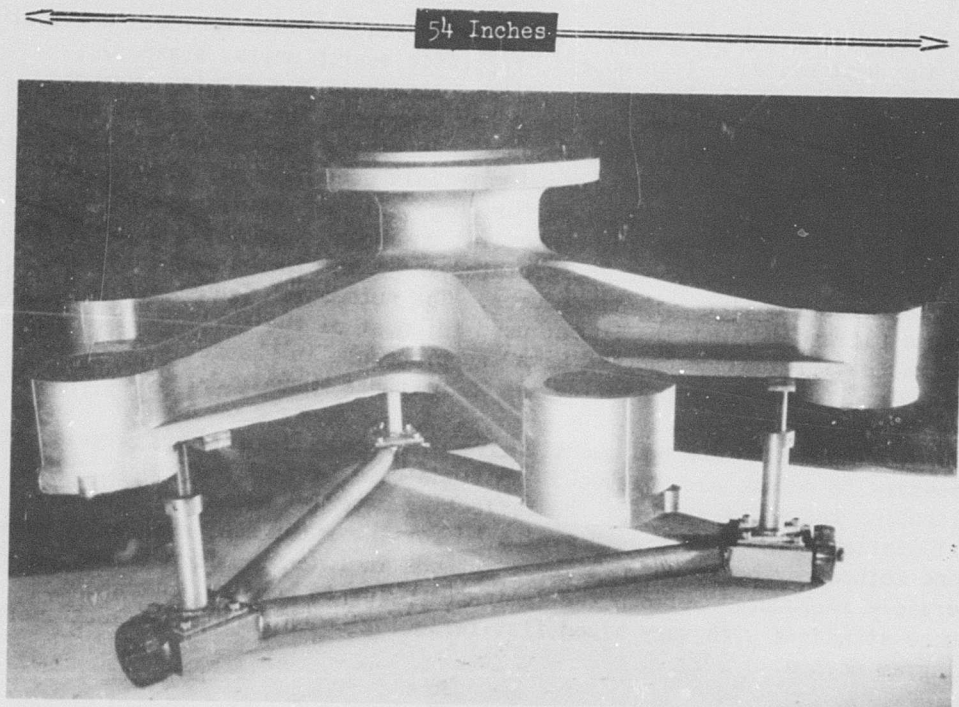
Ultrasonic Level-Positioner Fixture for H-53 Rotor Hub
